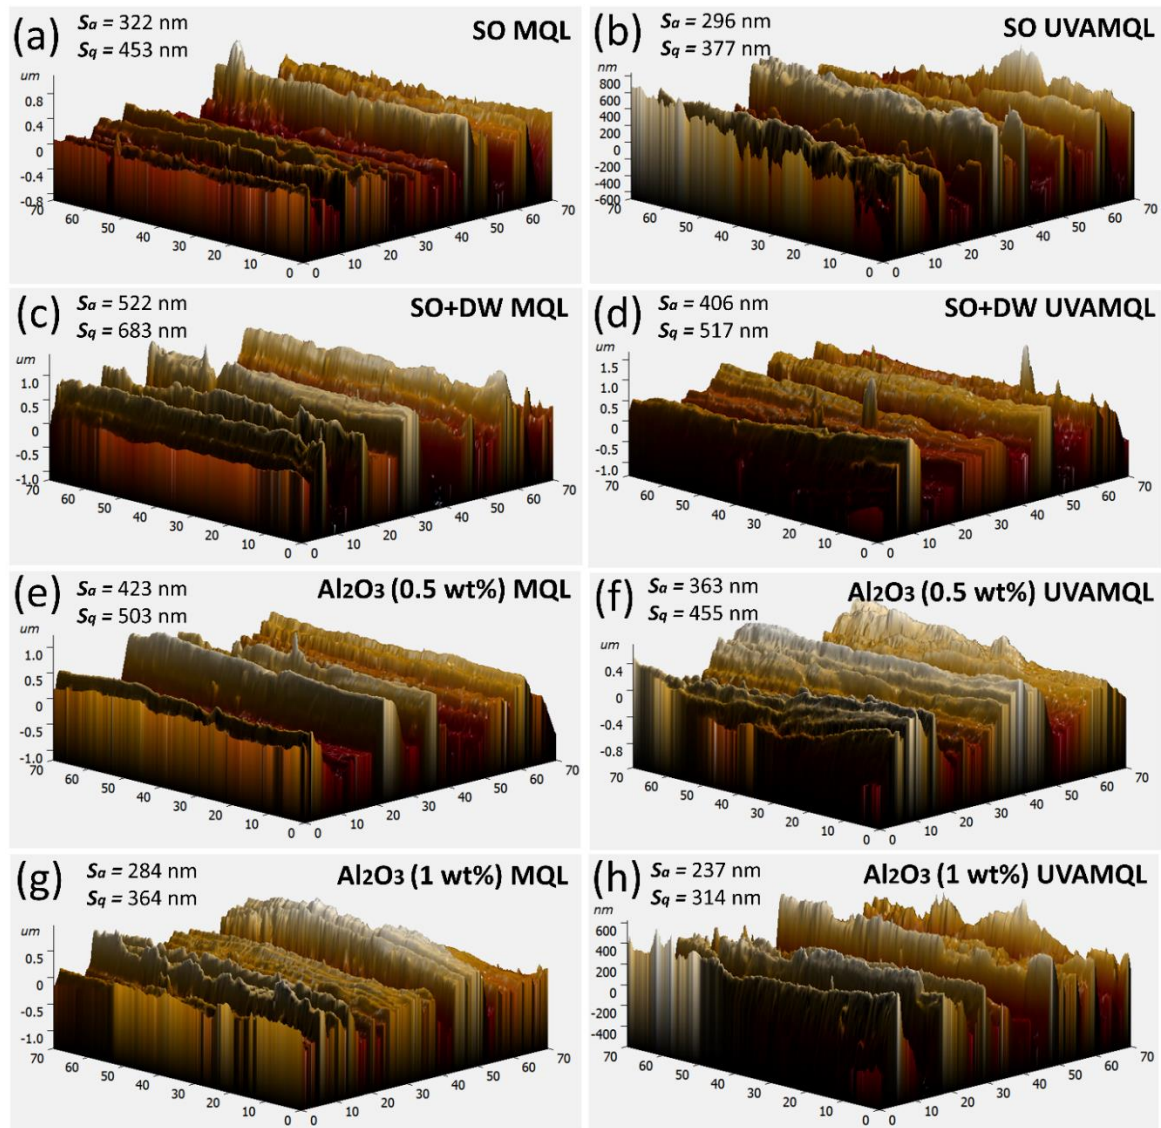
3D surface topography of AISI D2 tool steel under MQL and UVAMQL grinding modes
